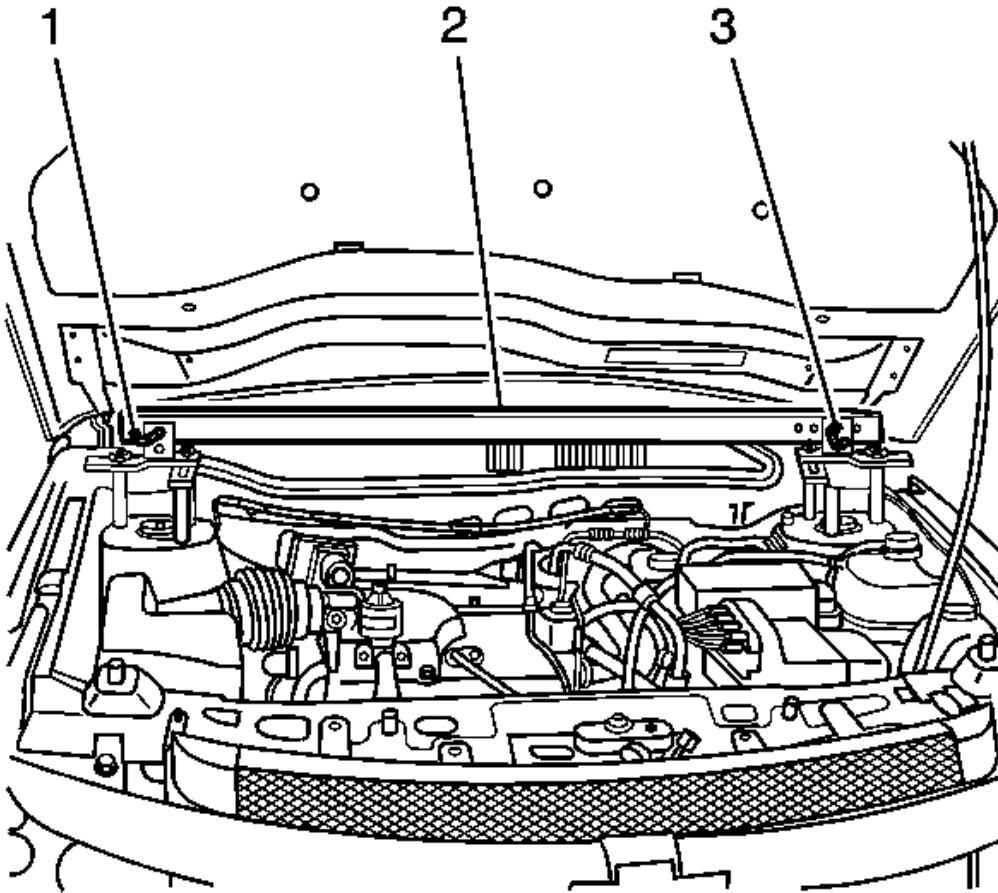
View Of Engine Support Fixture Cross Bar & Safety Pins
